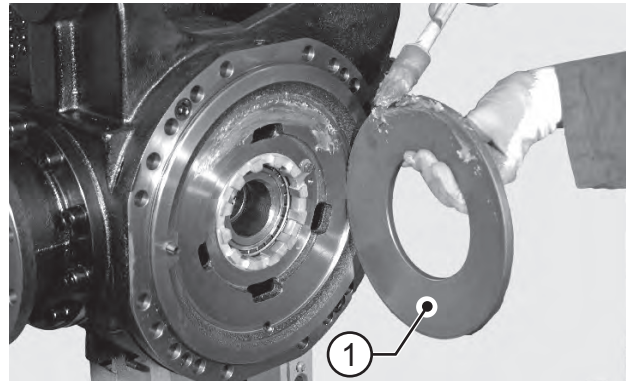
Position the Belleville washers (1) and engage the cylinder, spread grease over the contact surfaces to hold them in position while mounting on the central housing.
